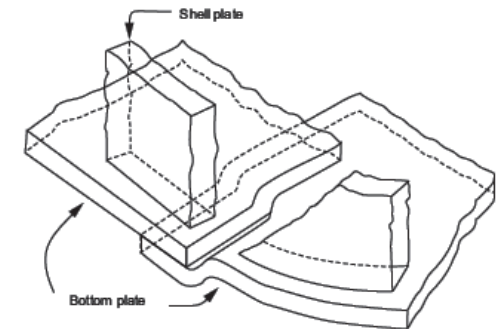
Method for Preparing Lap-welded Bottom Plates under Tank Shell (See 5.1.5.4)
